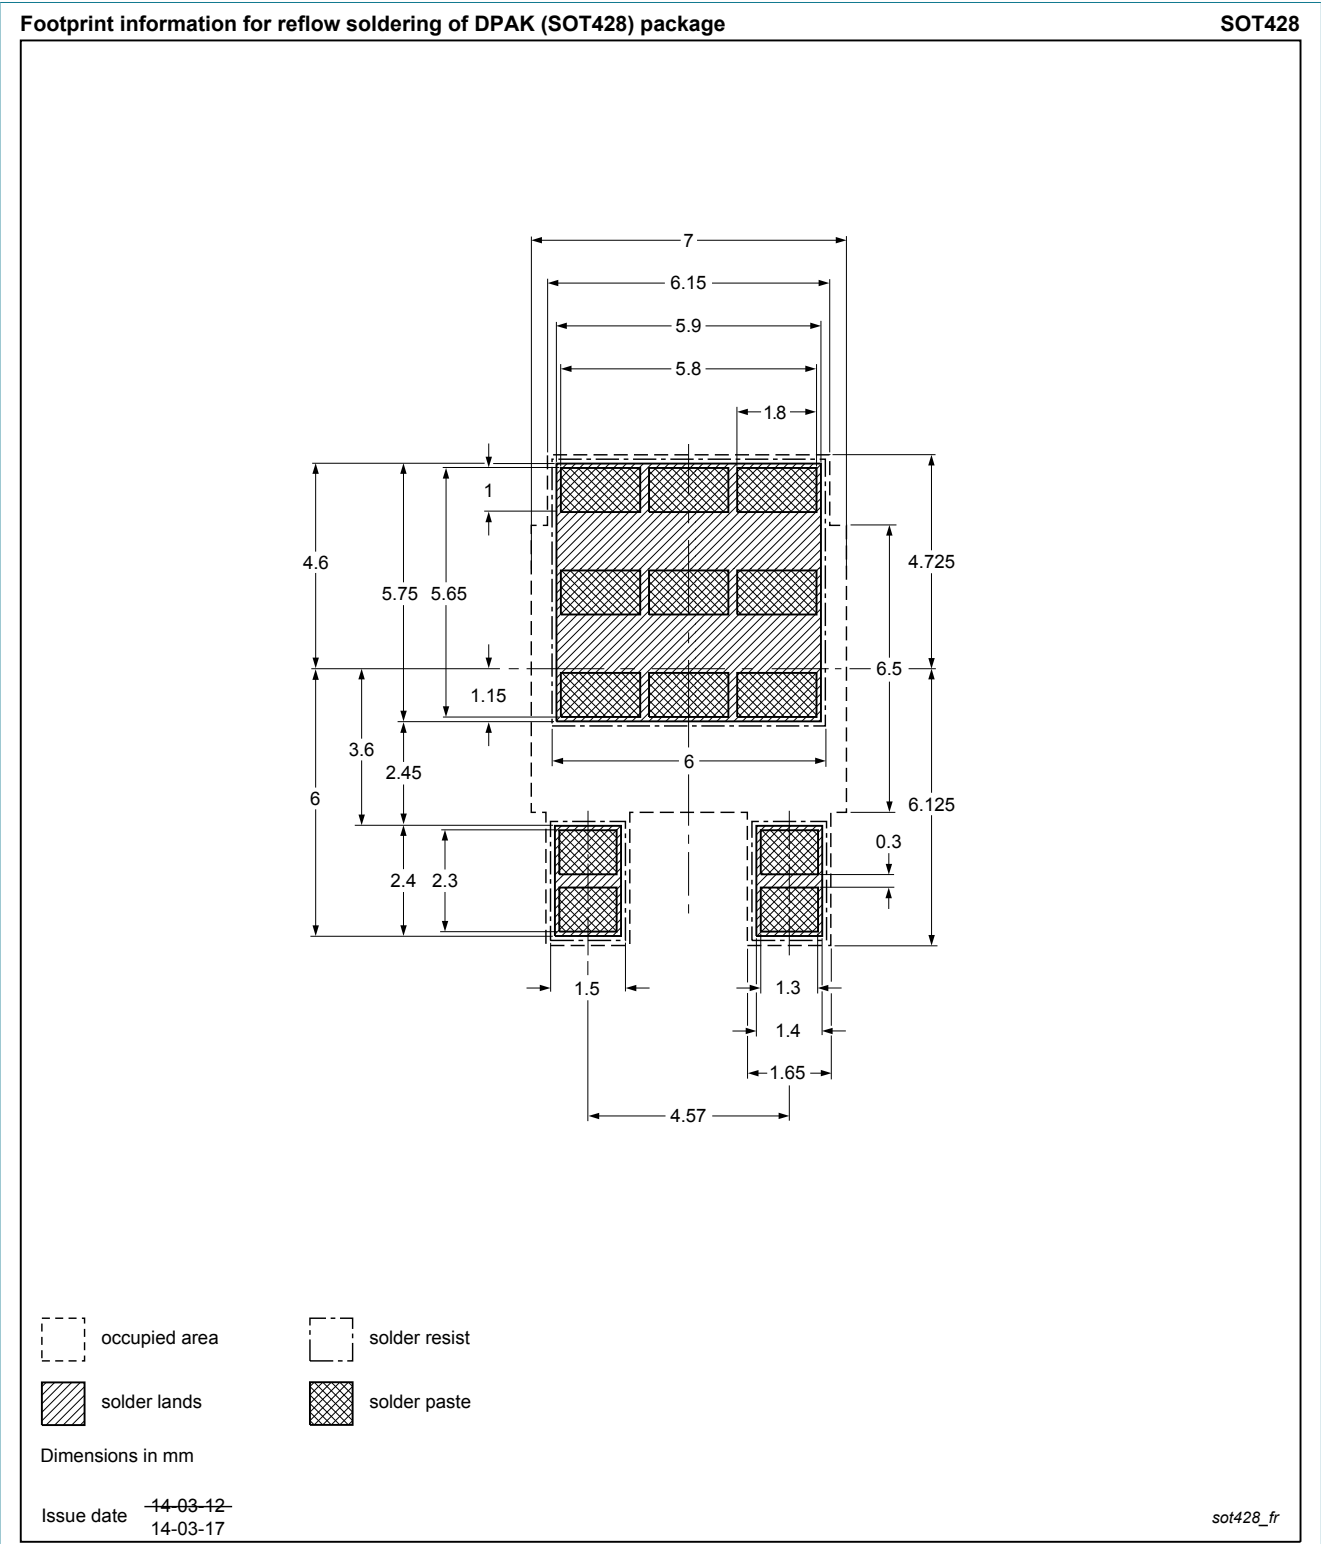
Reflow soldering footprint for DPAK (SOT428)
